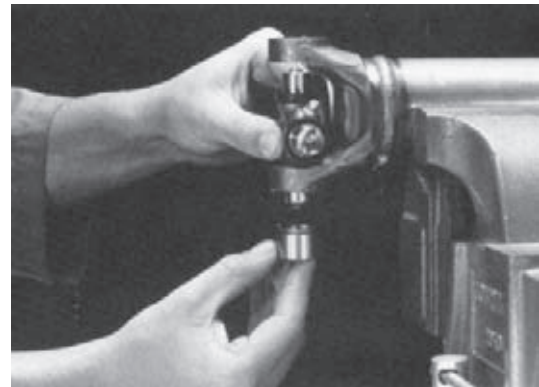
A U-joint should be assembled so that the cross is positioned with a compression load at the zerk fitting. The cross will fracture more easily if it is positioned with a tension load.
